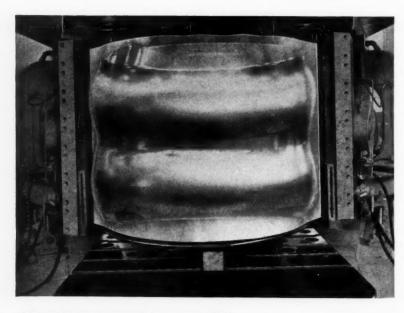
Sheet-metal Stretch-wrap Forming Machine Developed by the Hufford Machine Works, Inc.
